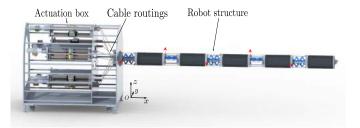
CAD of hyper-redundant robot. Each actuator drives one DOF of the robot.
